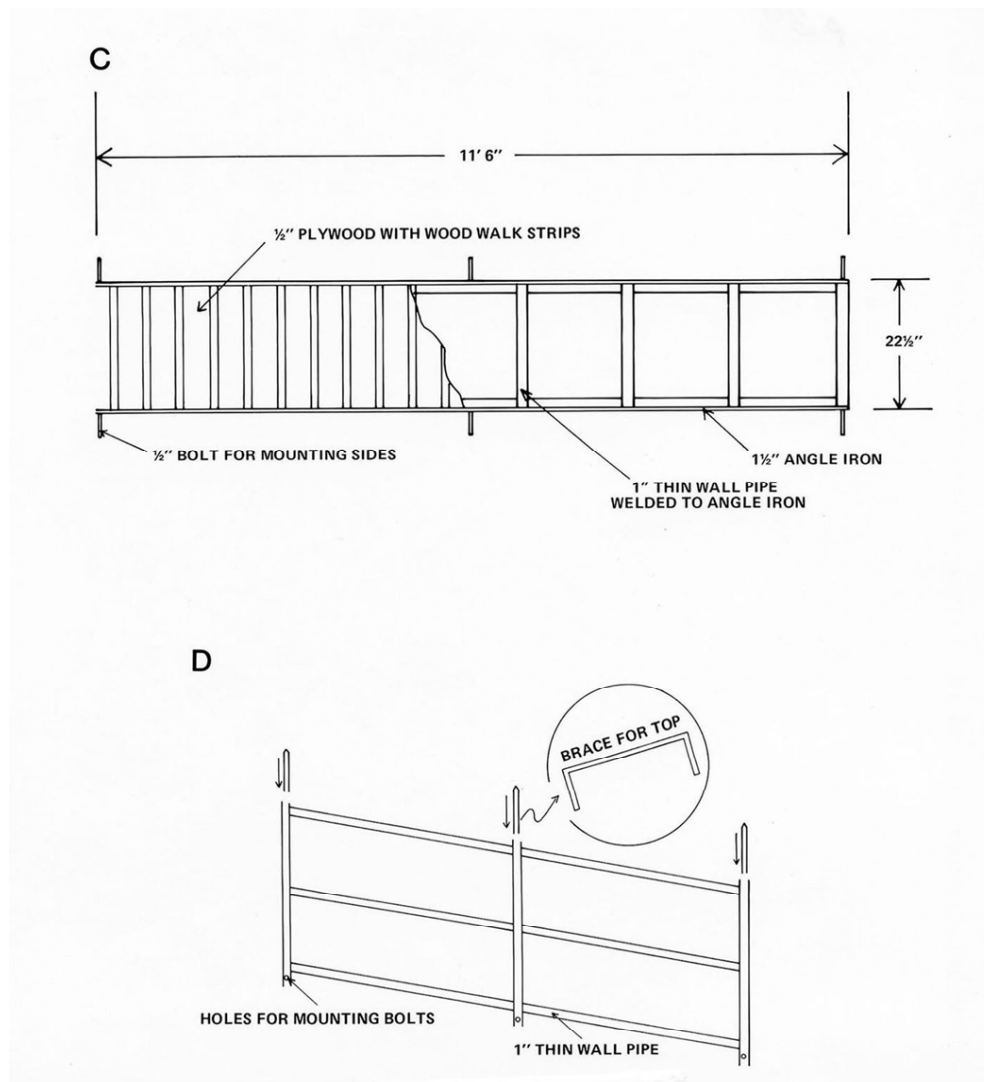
Construction details of pronghorn loading chute. C = details of the bottom frame and D = details of the side frame (from McKenzie 1984).
